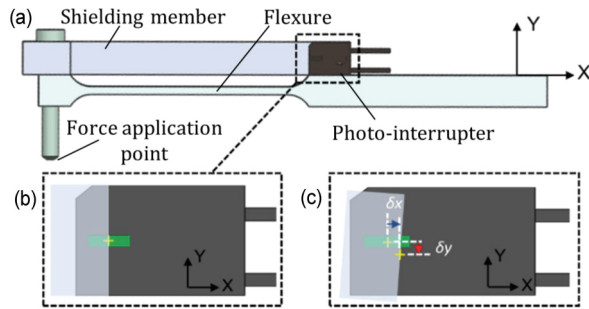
(a) Force sensor assembly; (b) the initial position of the sensor; (c) displacement of shield inside the light window for bending of the attached flexure.
